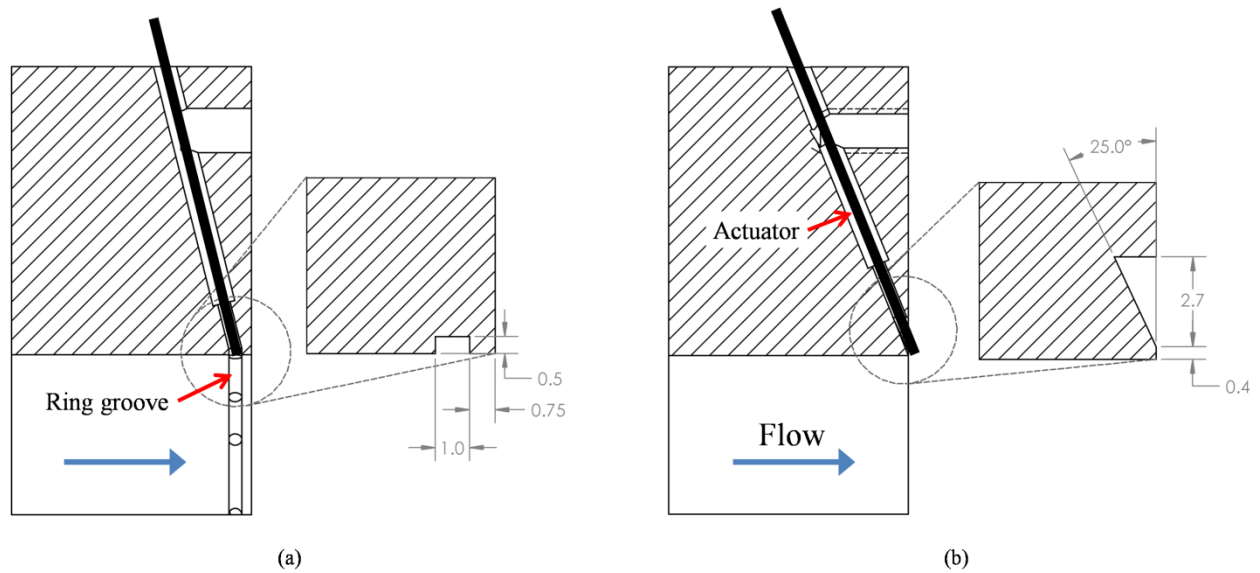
Cross-section view of (a) the traditional extension with an internal ring groove and (b) the external electrode extension with a recess on the extension face (dimensions are in mm).
